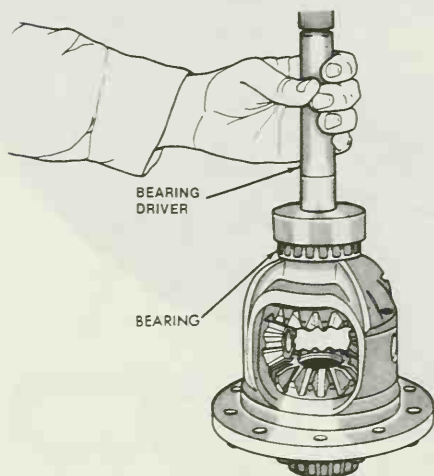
Bearings are installed on both sides of the case using a bearing driver or press. (Chrysler Corporation)
